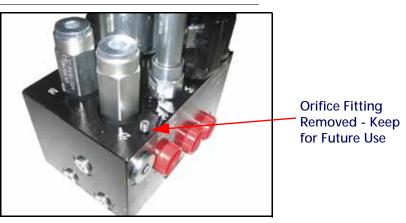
Port Plugs Removed from the AutoBoom Valve
